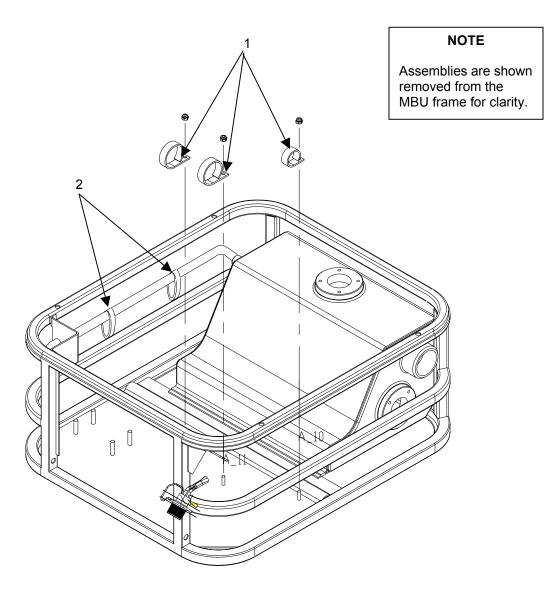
Inspect Chassis Mounted Cable Clips and Hose Clamps
